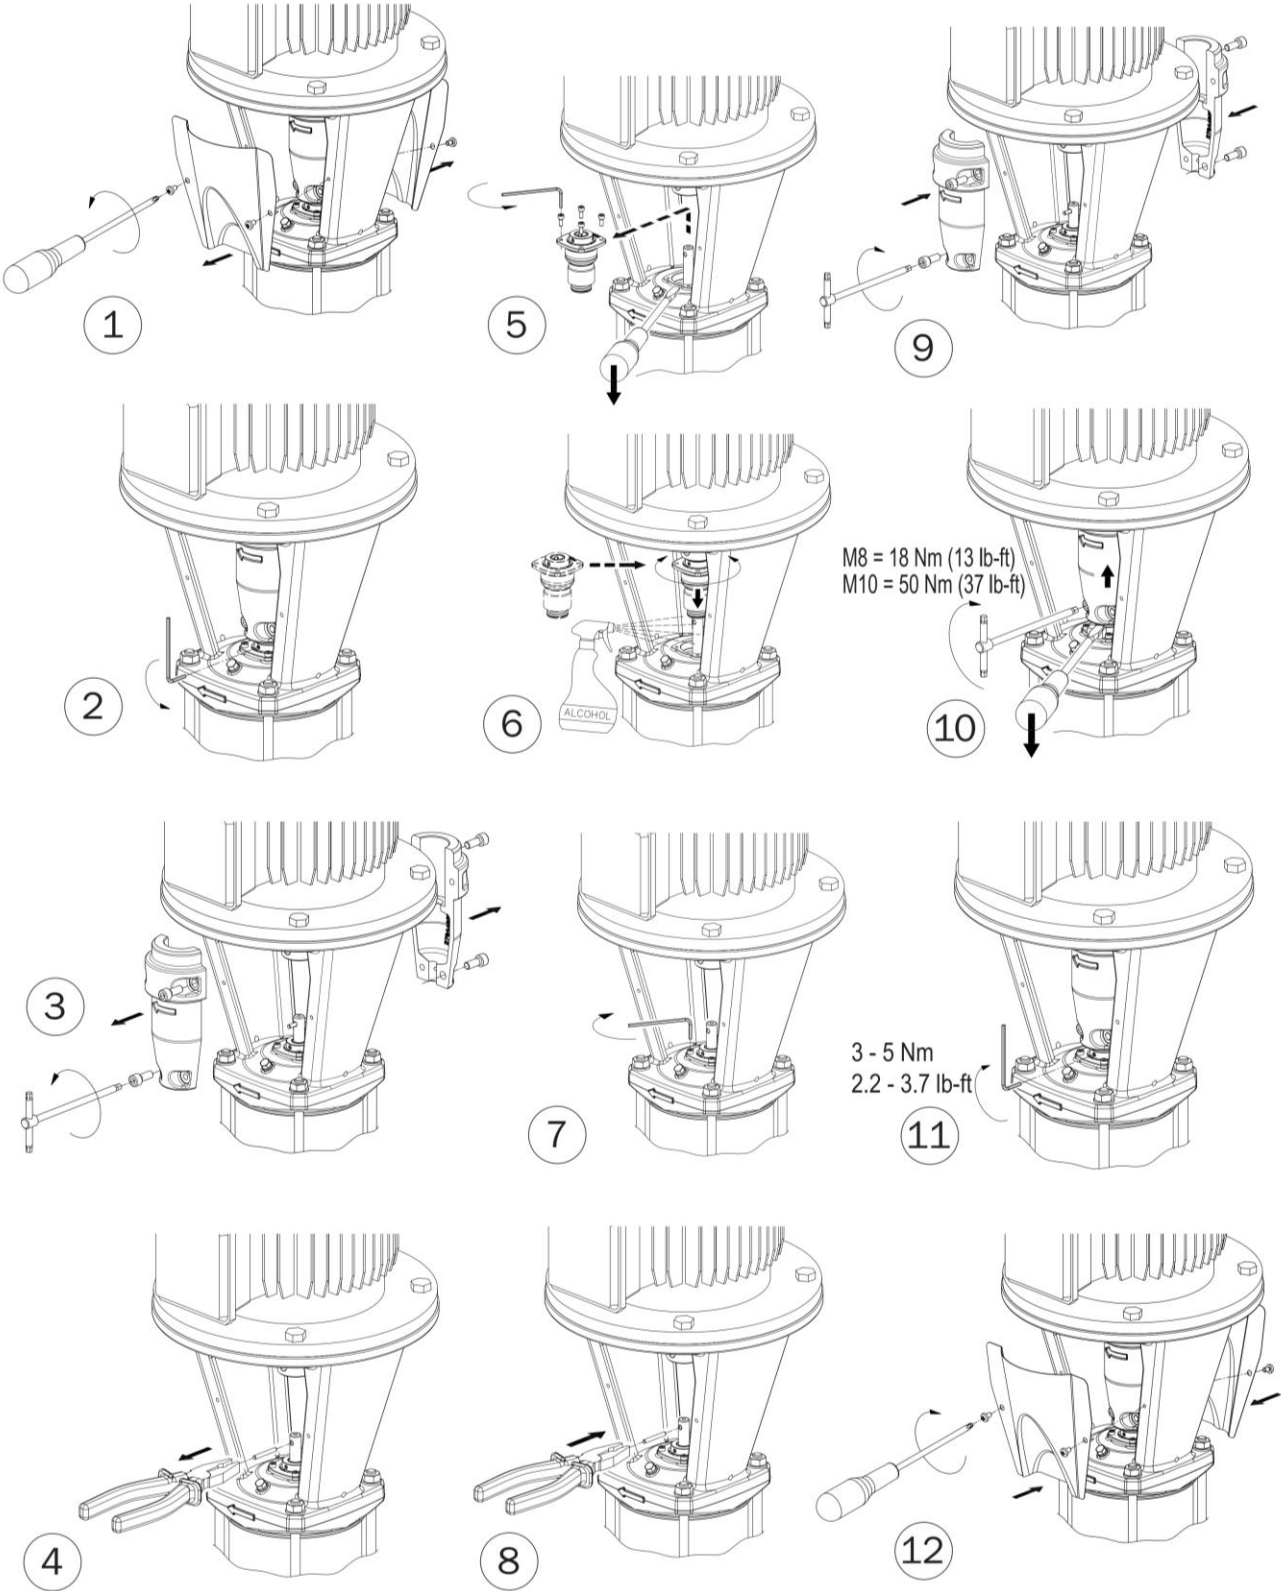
Replacement of Shaft Seal RSVS 1-3-5-10-15-20 Spacer Coupling [-C-]
